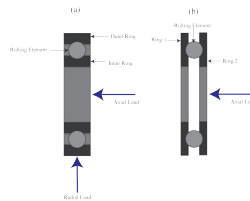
Two bearing types: (a) Deep Groove Ball Bearing and (b) Thrust Bearing
